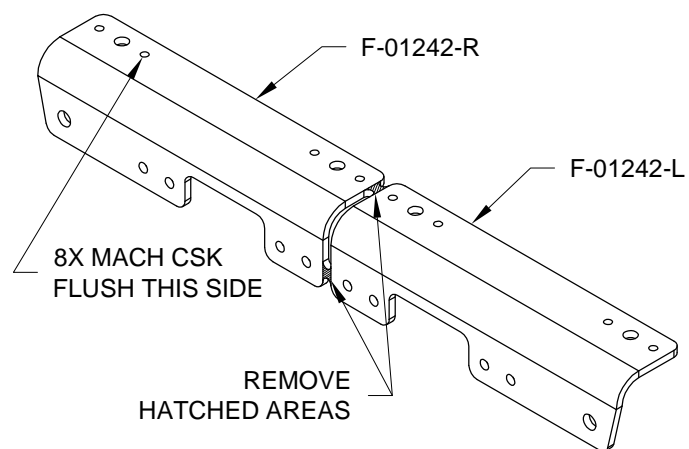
COUNTERSINKING & SEPARATING F-01242
